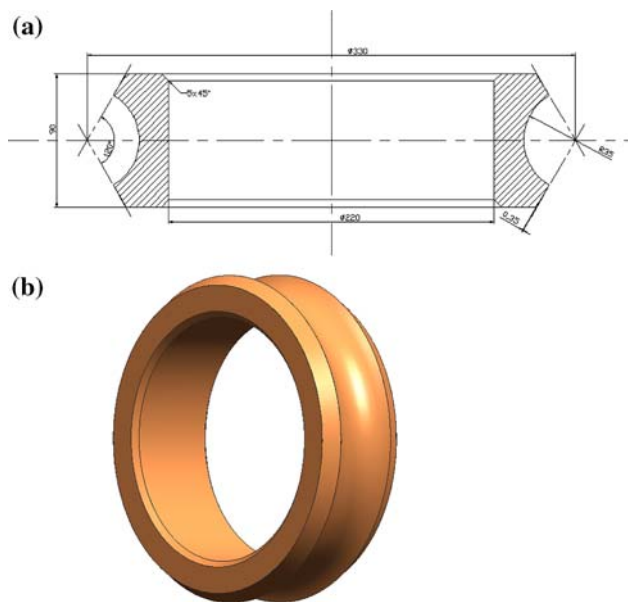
The shape and dimensions of finished HSS roll: (a) dimension drawing; and (b) outside drawing
